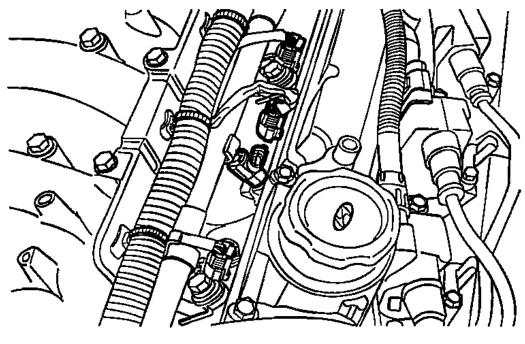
Removing Surge Tank Gasket Courtesy of KIA MOTORS AMERICA, INC.
